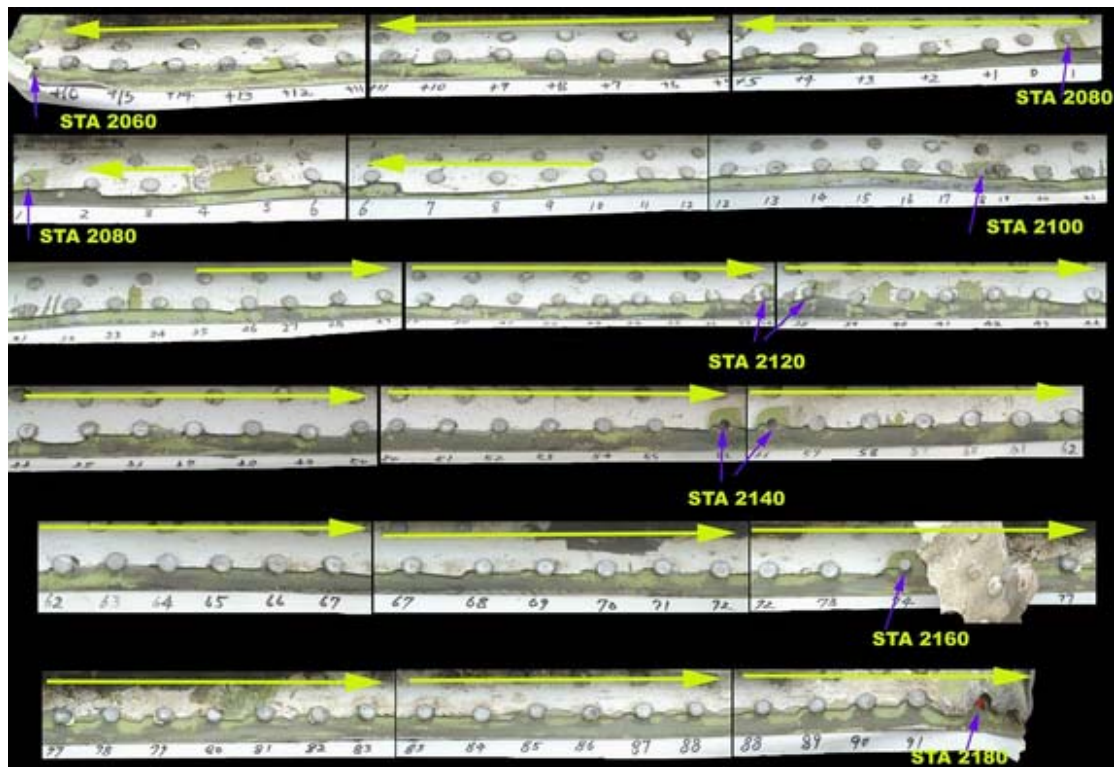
Shows an overall view of the skin fracture surface along the direction of stringer S-49L
